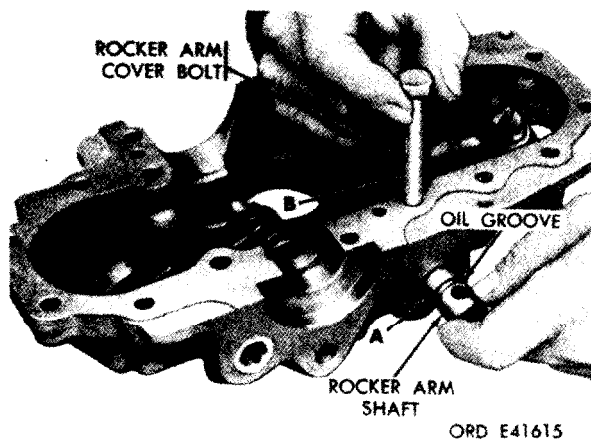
Removing valve rocker arm shafts and valve rocker arms.
